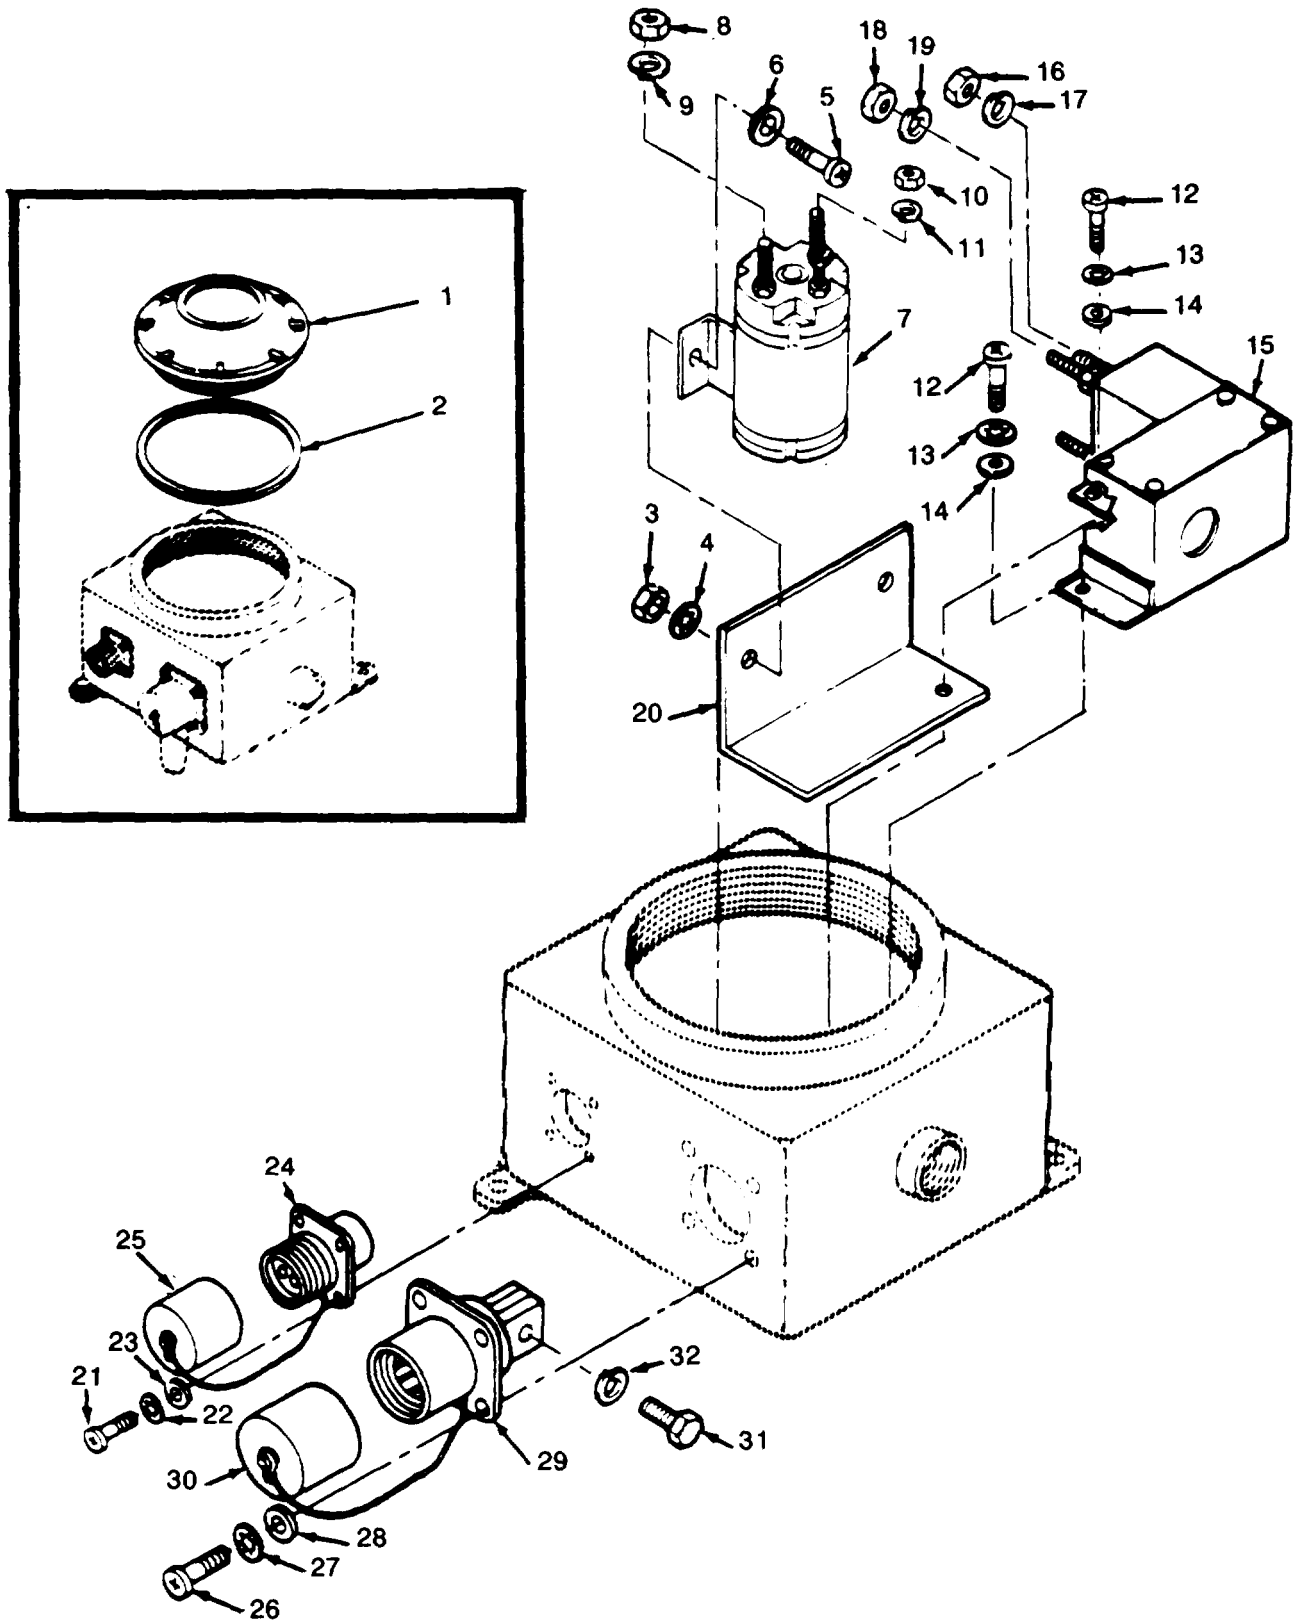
Junction Box Assembly (Sheet 1 to 2)
